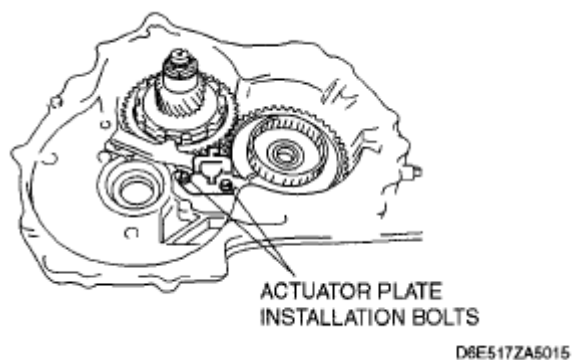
View Of Actuator Plate To Transaxle Case Bolts
